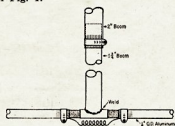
Method of mounting the yagi reflector and director to the boom ends is shown above. The details are given in the text.
